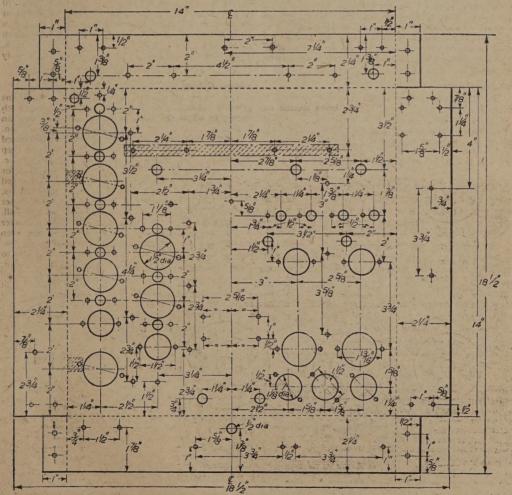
Main chassis details. The unmarked holes are either \$\frac{1}{8}\$ in. or \$\frac{2}{8}\$ in. in diameter and suit grommets, variable controls, and clearance for 6 BA bolts.
